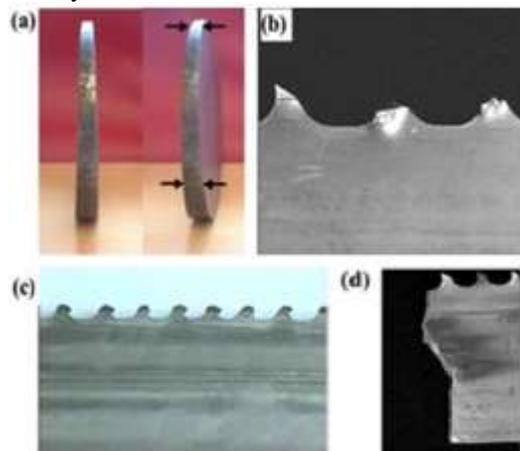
Band saw failure modes: a) out of square cut b) tooth failure c) tooth wear and d) fatigue failure.^[2]
